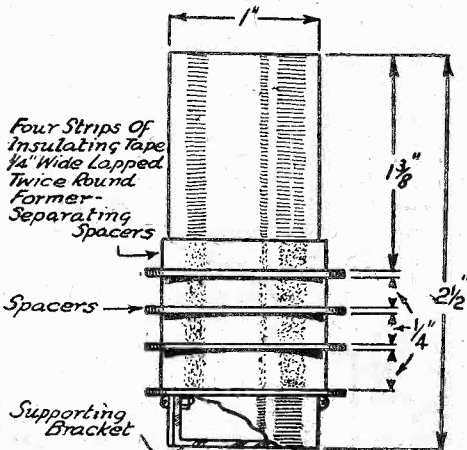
Dimensioned sketch of the paxolin former, showing how the washers are spaced by means of insulating tape.
